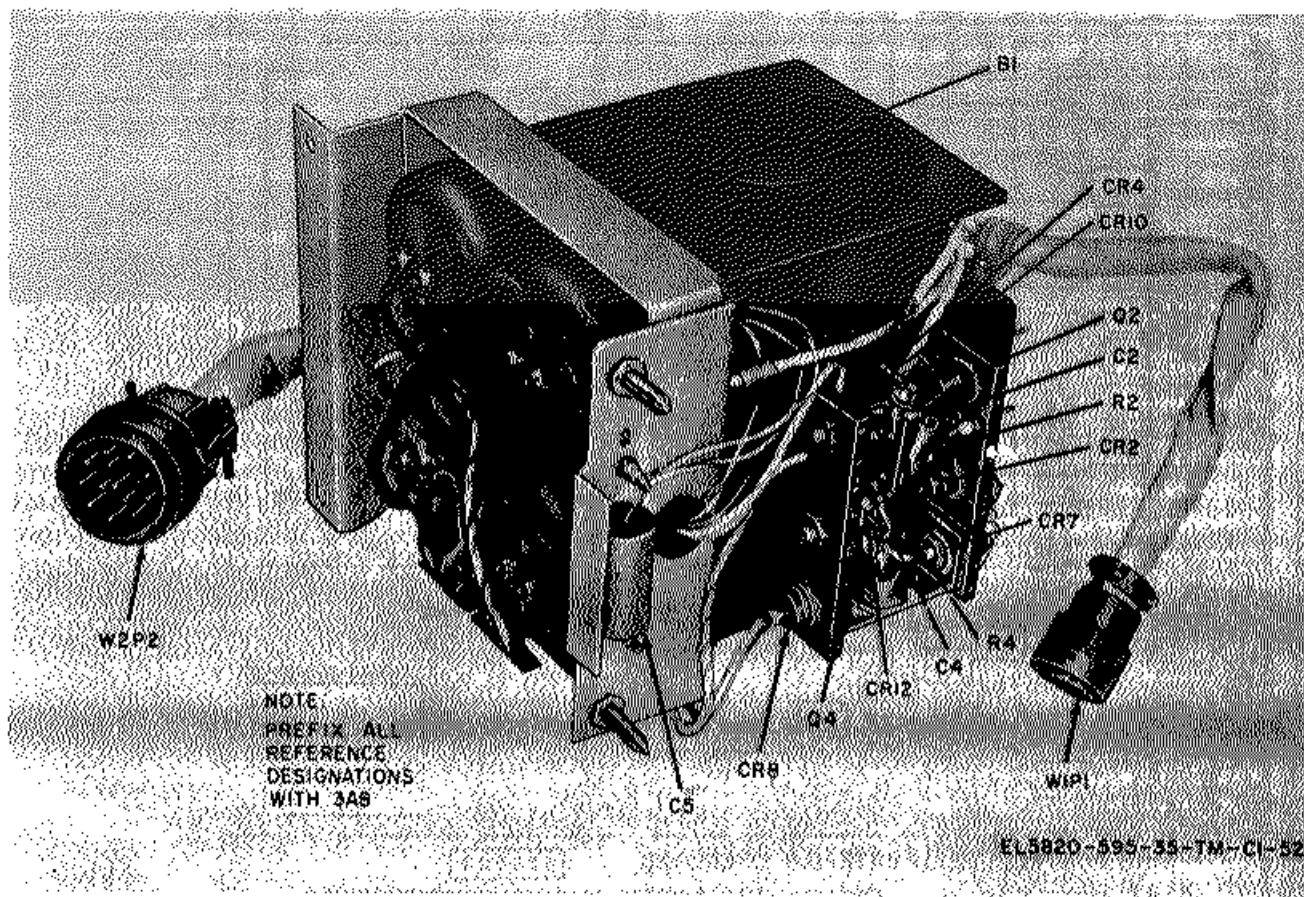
Inverter 3A8, rear oblique view, parts location diagram.
